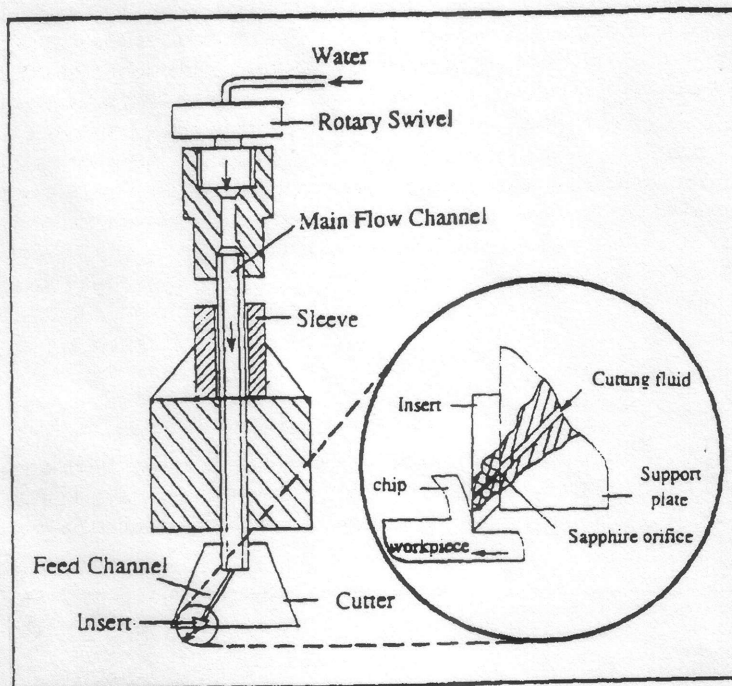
High pressure waterjet coolant/lubricant system through tool rake face.
